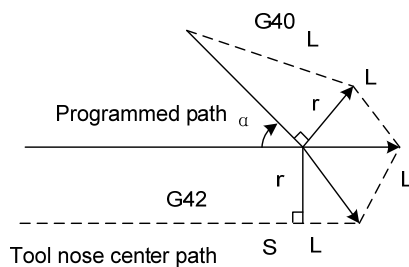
Linear-linear (cutting outside and canceling offset)
